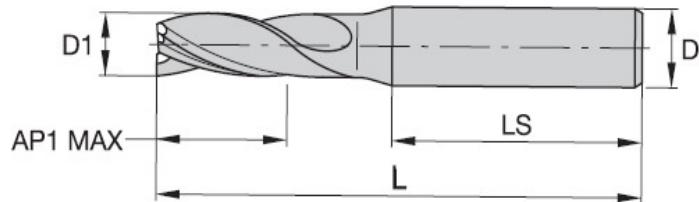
Used milling cutter F3AH1800ADL30 including of all sizes
